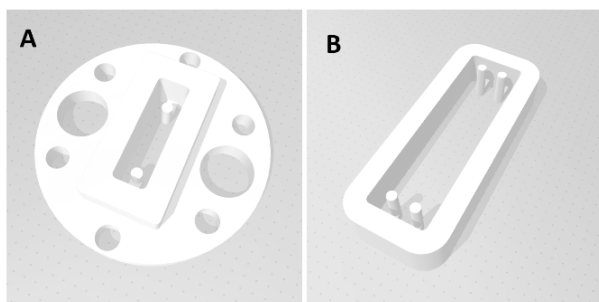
3D printed moulds for tissue engineering Model B & C - (A) single-piece 50µL mould with one pole on each side of the mould. (B) 500µL mould with two poles on each side. [13]
